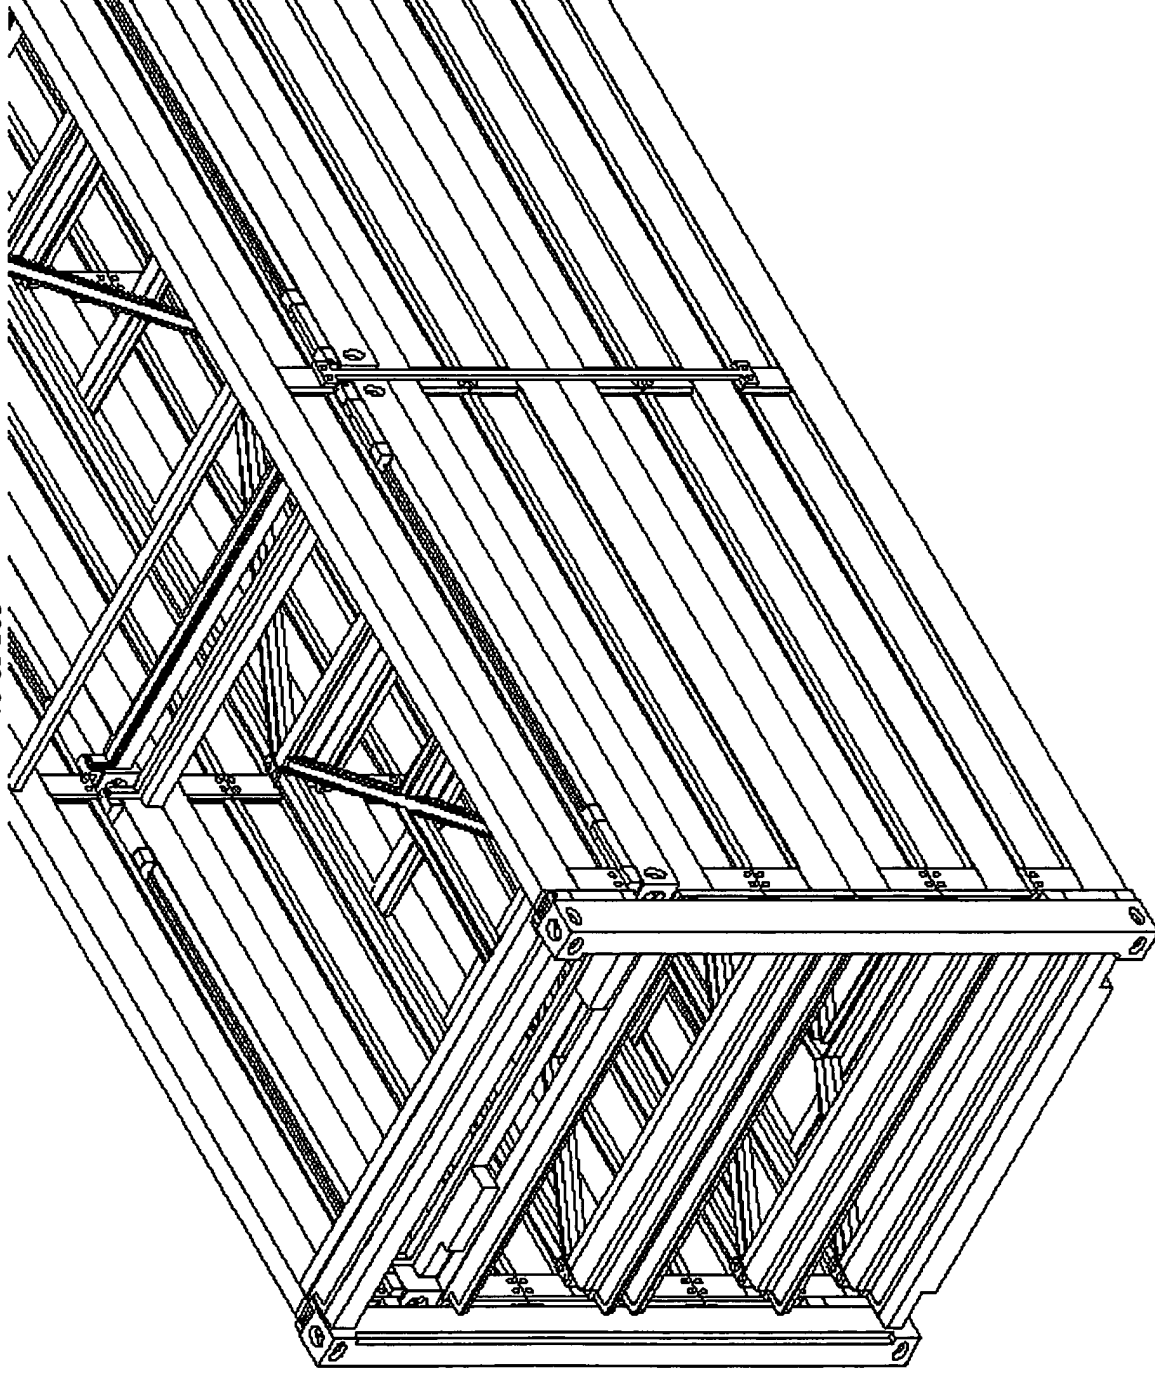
B: Detailed isometric view of the 40 foot high cube collapsible cargo container frame loaded with two collapsed 40 foot high cube collapsible cargo container panels
